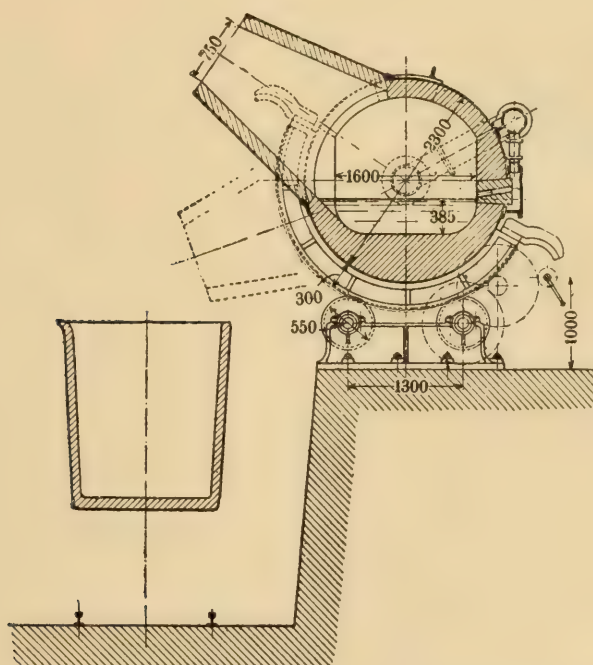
Sectional Elevation of Converter Used at Rheinhausen.
